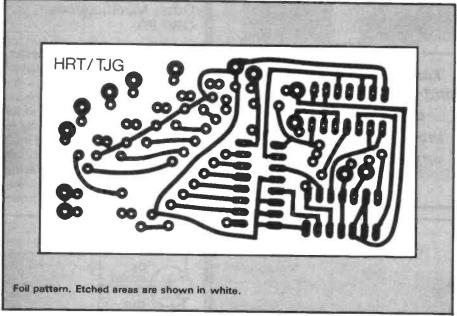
shows the completed PCB layout which was sufficiently small for placing inside the converted rig. After constructing the unit, the following conversions will need be made to the display area of the rig.
